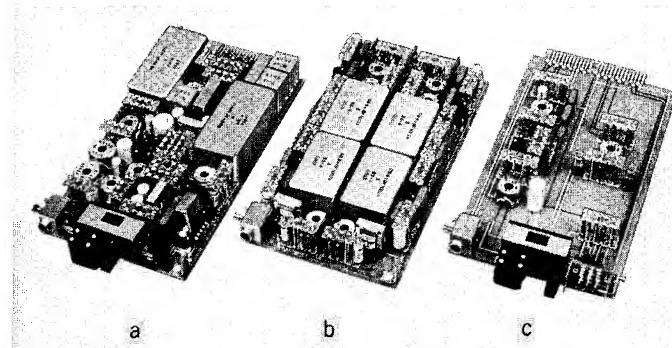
Plug-in unit: (a) channel unit, (b) pregroup unit, (c) transmitting amplifier unit.
